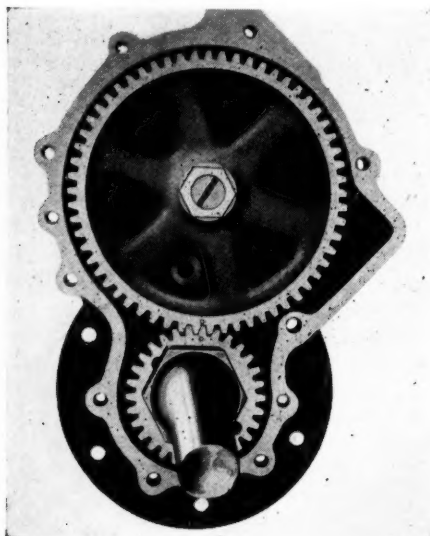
Two-gear train on the Maxwell motor using a Formica pinion on the crankshaft against a metal camshaft gear
